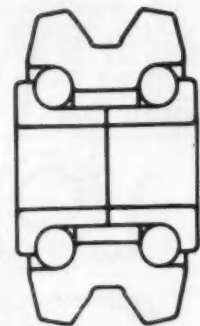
Ball-bearing roller in Marles gear represented a big step forward in the march toward anti-friction type gears.
